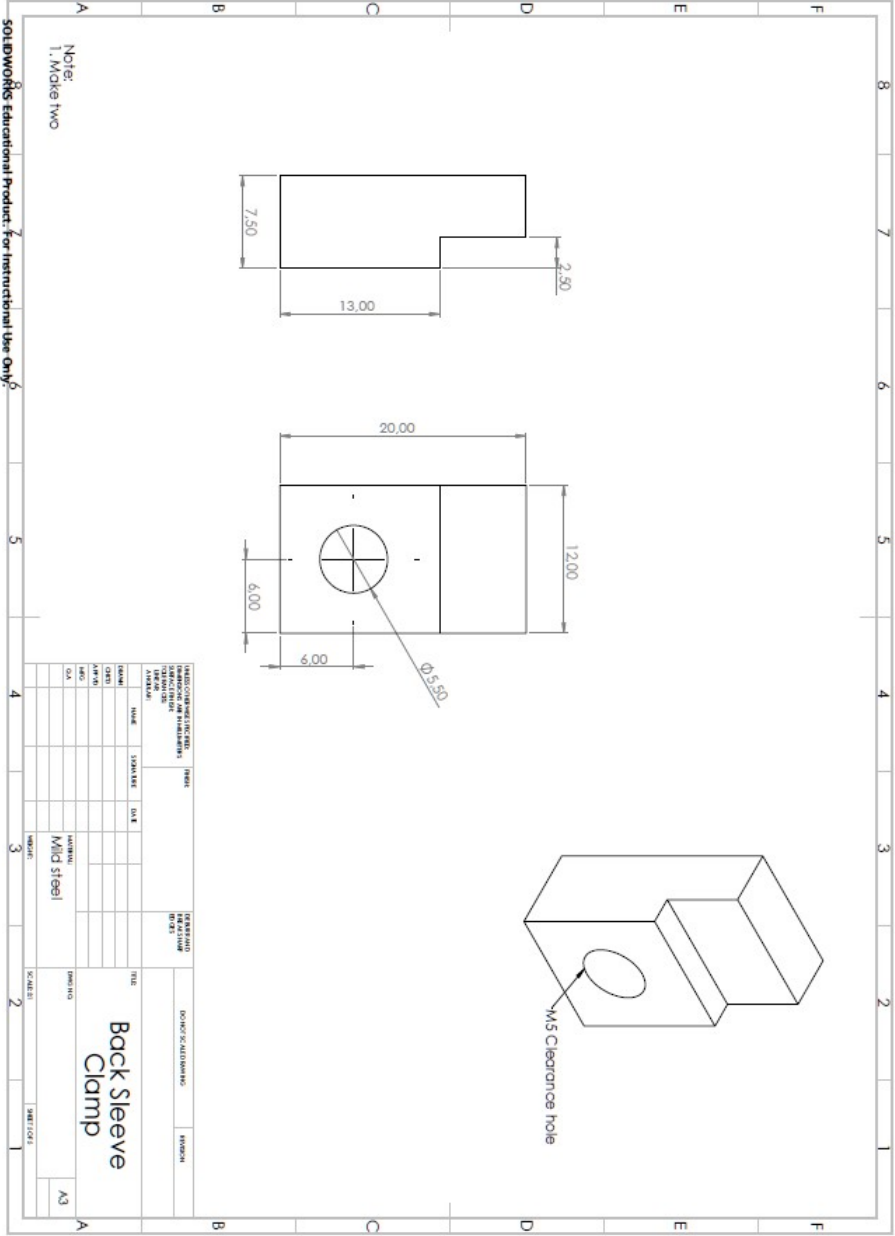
Part drawing for the sub-press sleeve back clamp.
